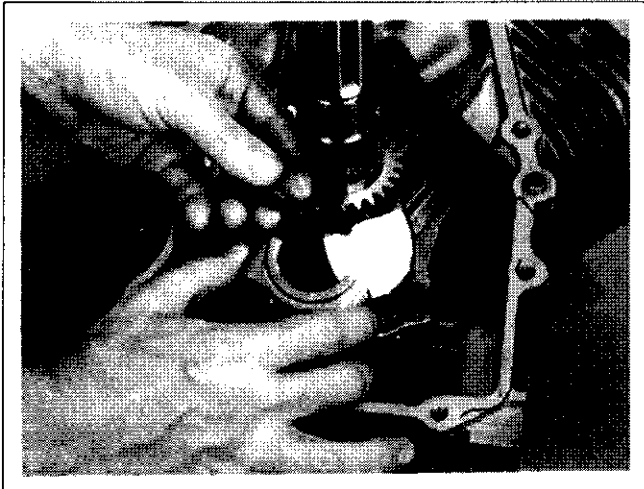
Installing Piston Assembly Using Ring Compressor Tool.
